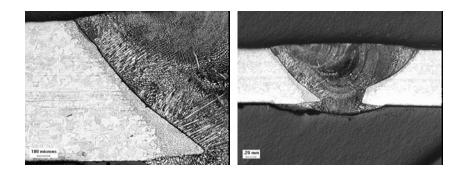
Repair Weld with Inco. 82 Filler Material
